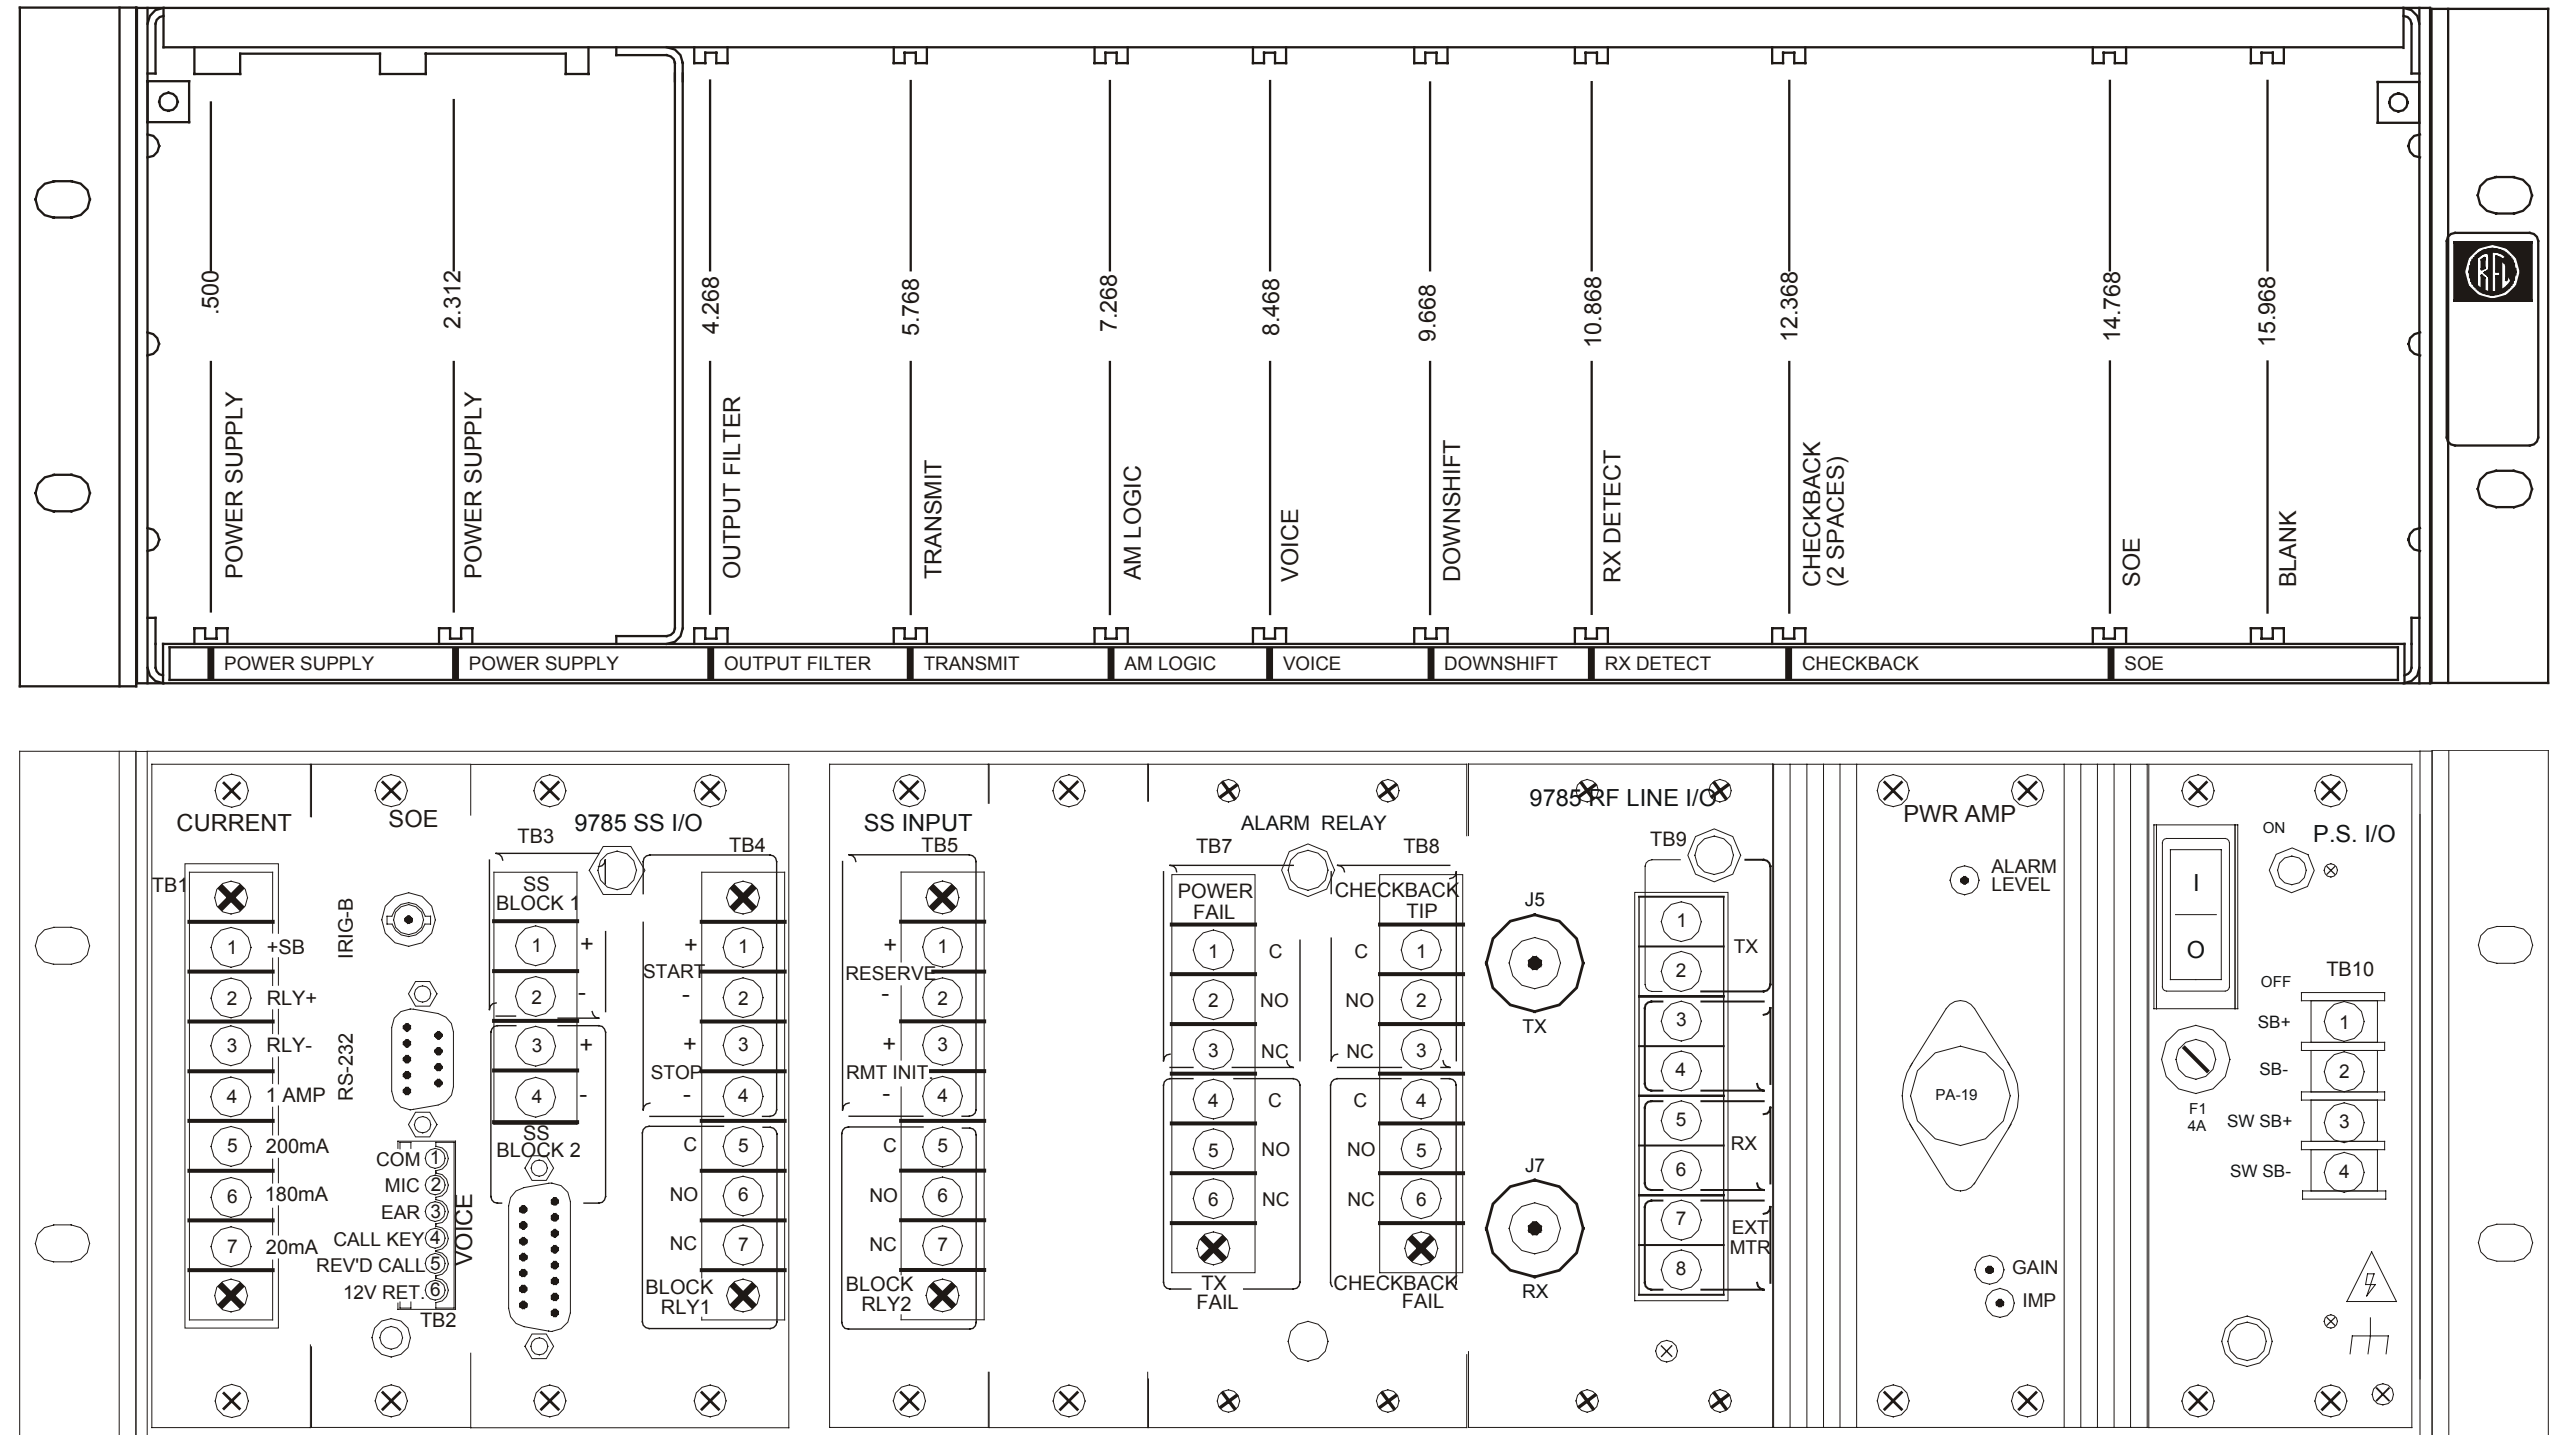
Locations of Circuit Board Modules in a Typical RFL 9785 Chassis (Dwg. No. D-106577-A)
